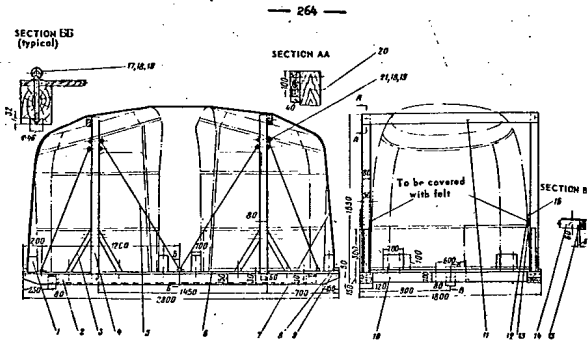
CARCASS PACKING FOR AIR INTAKE FRONT PART
